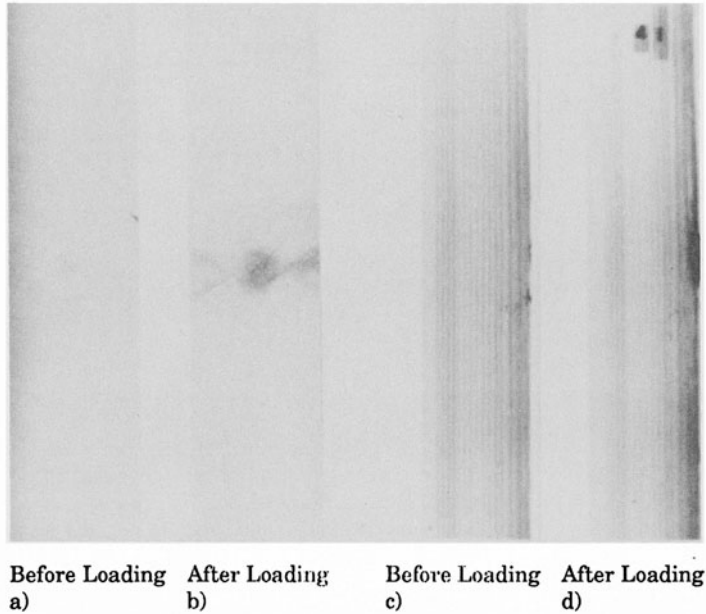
X-ray views of impact damage. a) Top view before loading. b) Top view after first ligament failure. c) Side view loading. d) Side view after first ligament failure.
